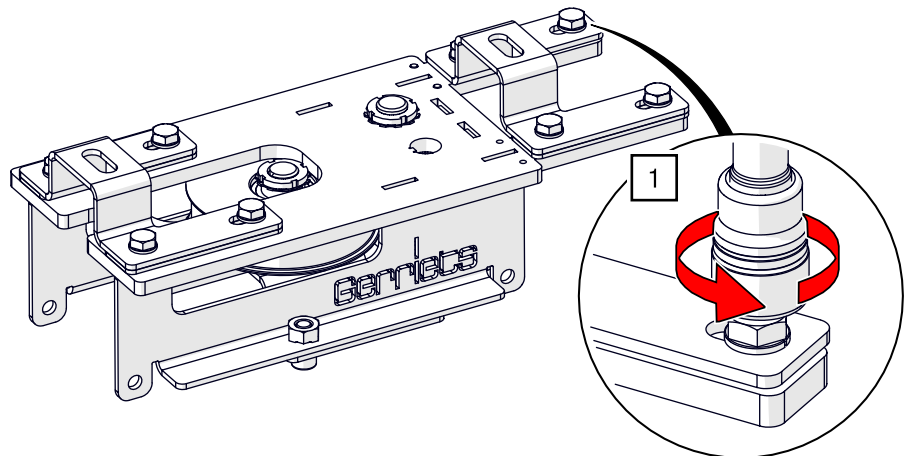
BELT-TRACK deflection unit – Loosen screws on clamping plate
